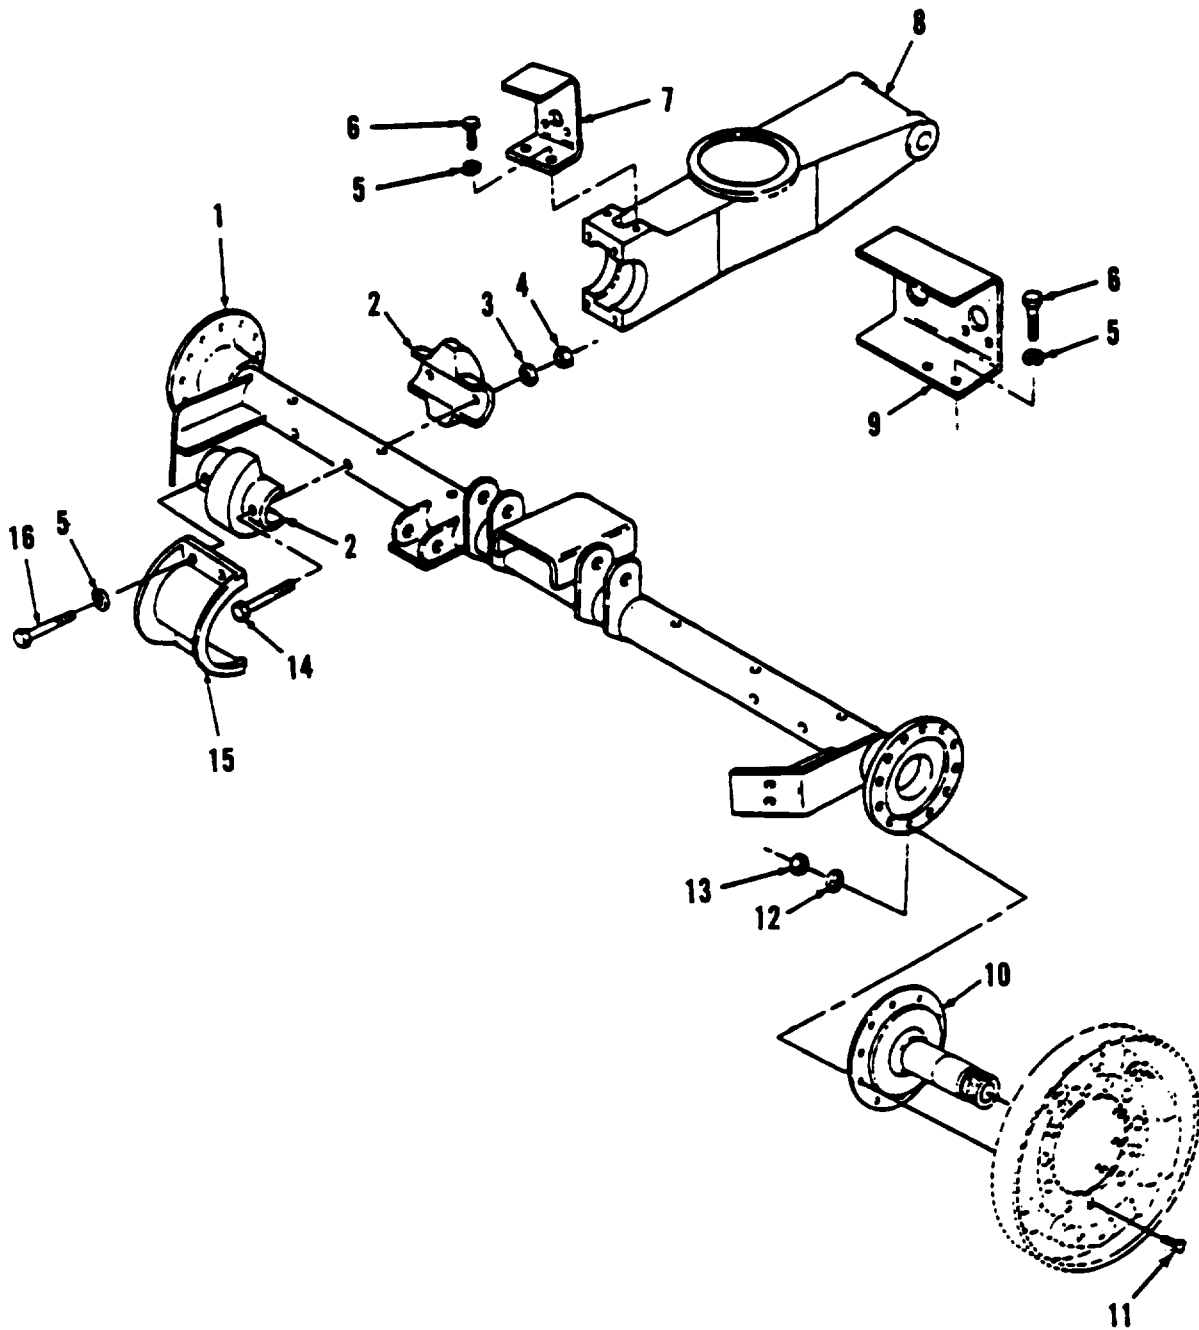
REAR AXLE ASSEMBLY (M689).
